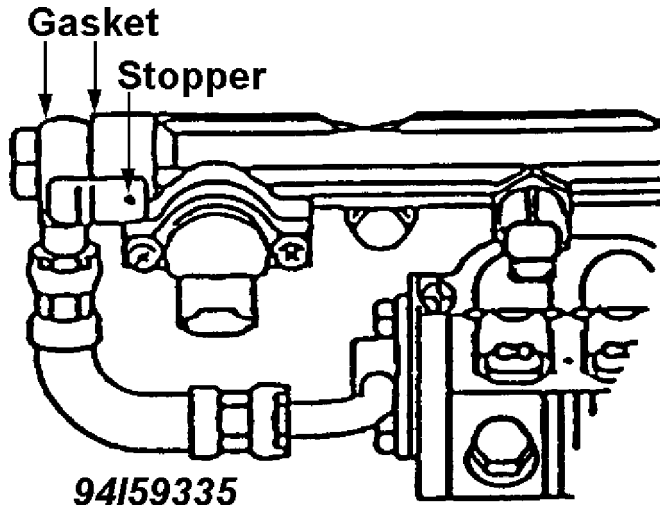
Installation of Fuel Hose on Secondary Fuel Distributor
